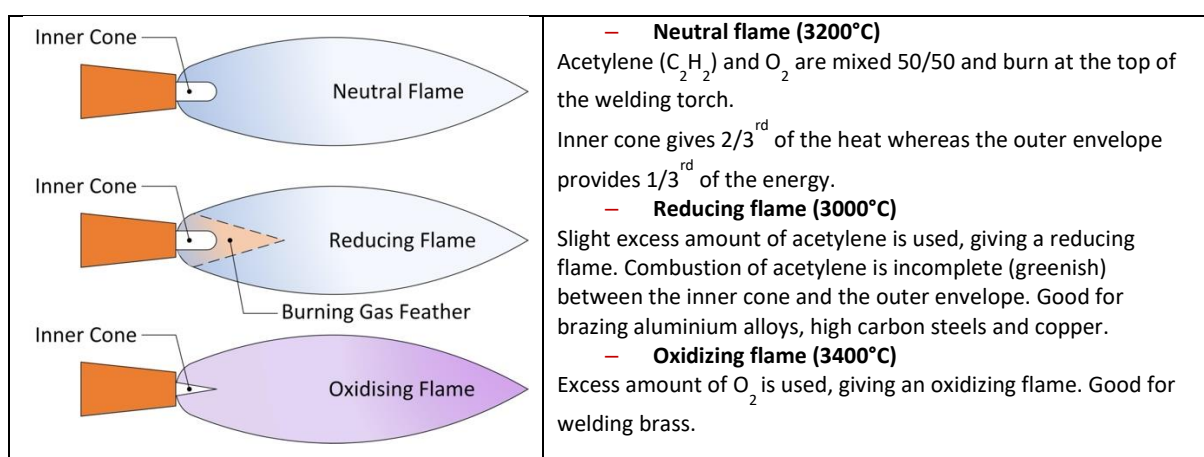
Recommended torch flame adjustment (Source: HEAT GmbH)
